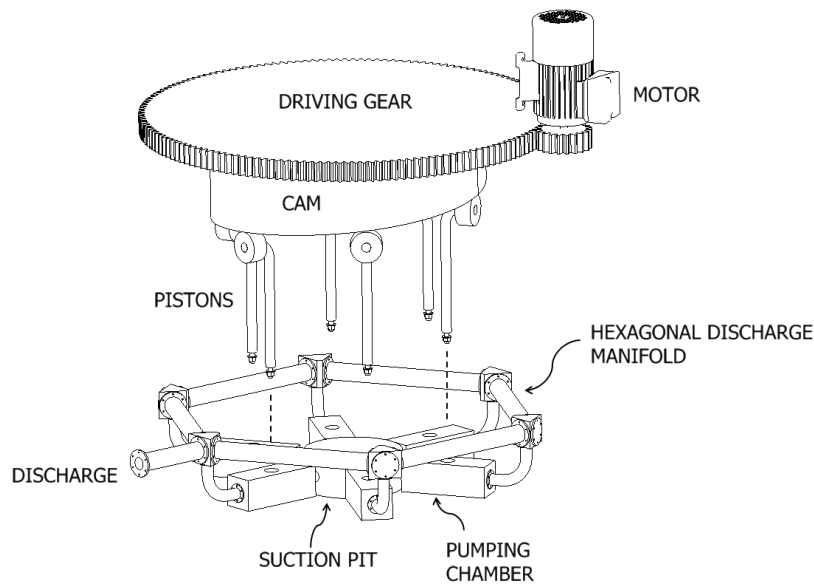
Schematic configuration of piston assemblies and power end in the hexagonal pump
